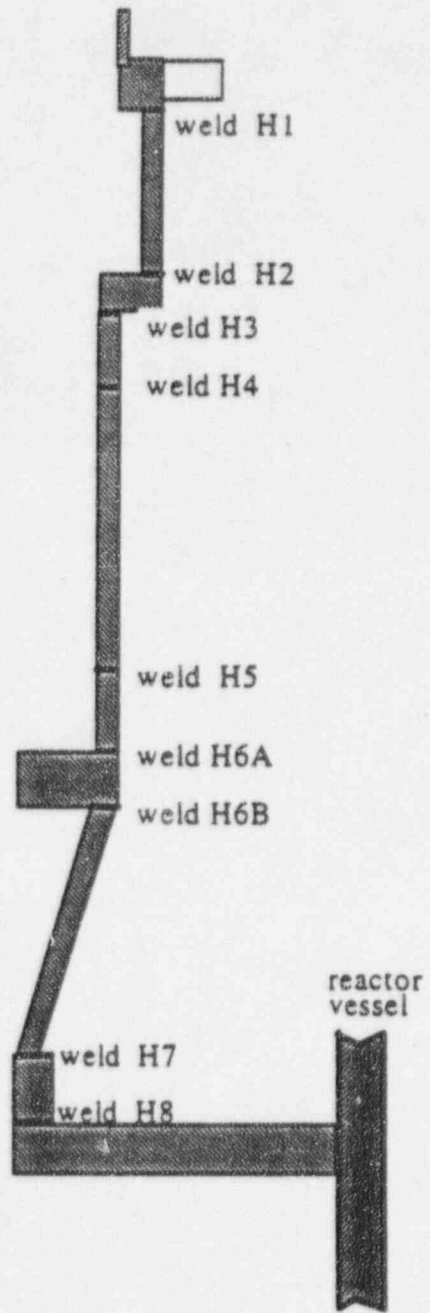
SHROUD HORIZONTAL WELDS
